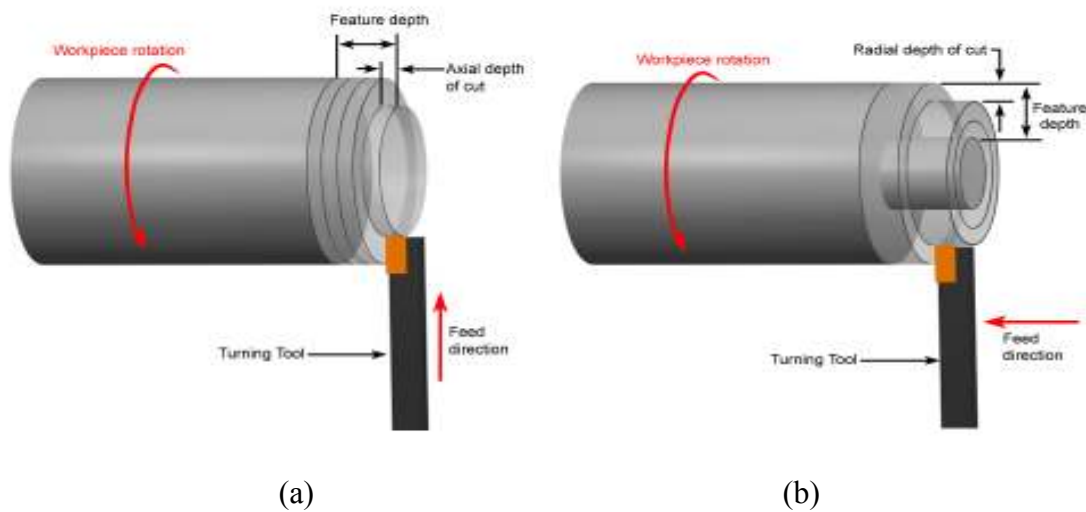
(a) Axial depth of cut, (b) Radial depth of cut.
